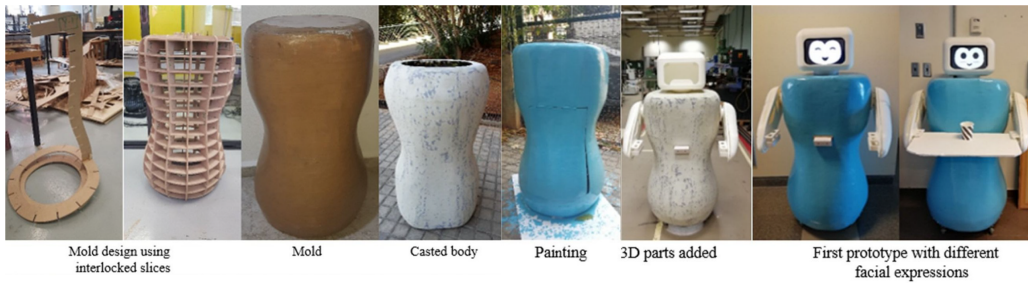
Sequence of pictures showing the manufacturing and assembly of the robot.
